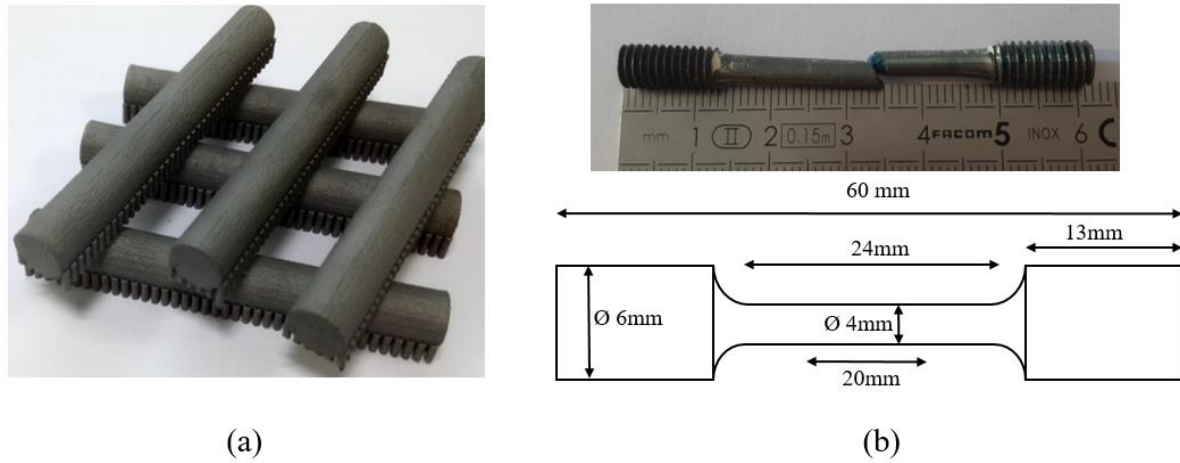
a) Tensile rods were manufactured for each alloy separately, b) Dimensions of tensile specimen after manufacturing from the AB rods for testing according to ASTM E8 standard
